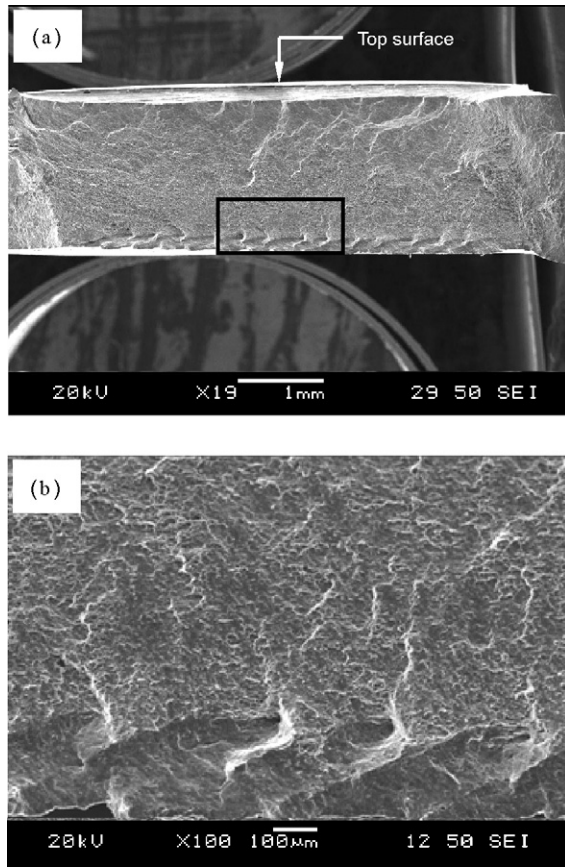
SEM images of fracture surfaces of a FSWed sample tested at a strain rate of $1 \times 10^{-3} \text{ s}^{-1}$. (a) Overall view at a lower magnification, and (b) details of welding defects at a higher magnification.
